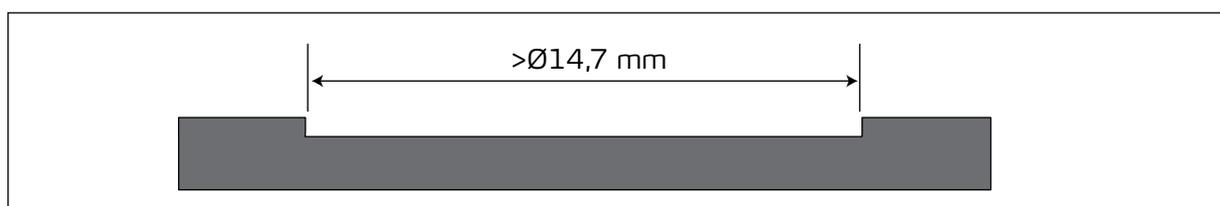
A retaining plate for the 40LA must have an opening wider than the diameter of the 40LA's lower housing.
